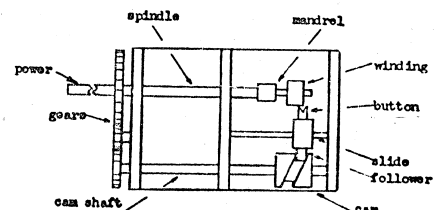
Universal Winding Machine with Cylindrical Cam.
